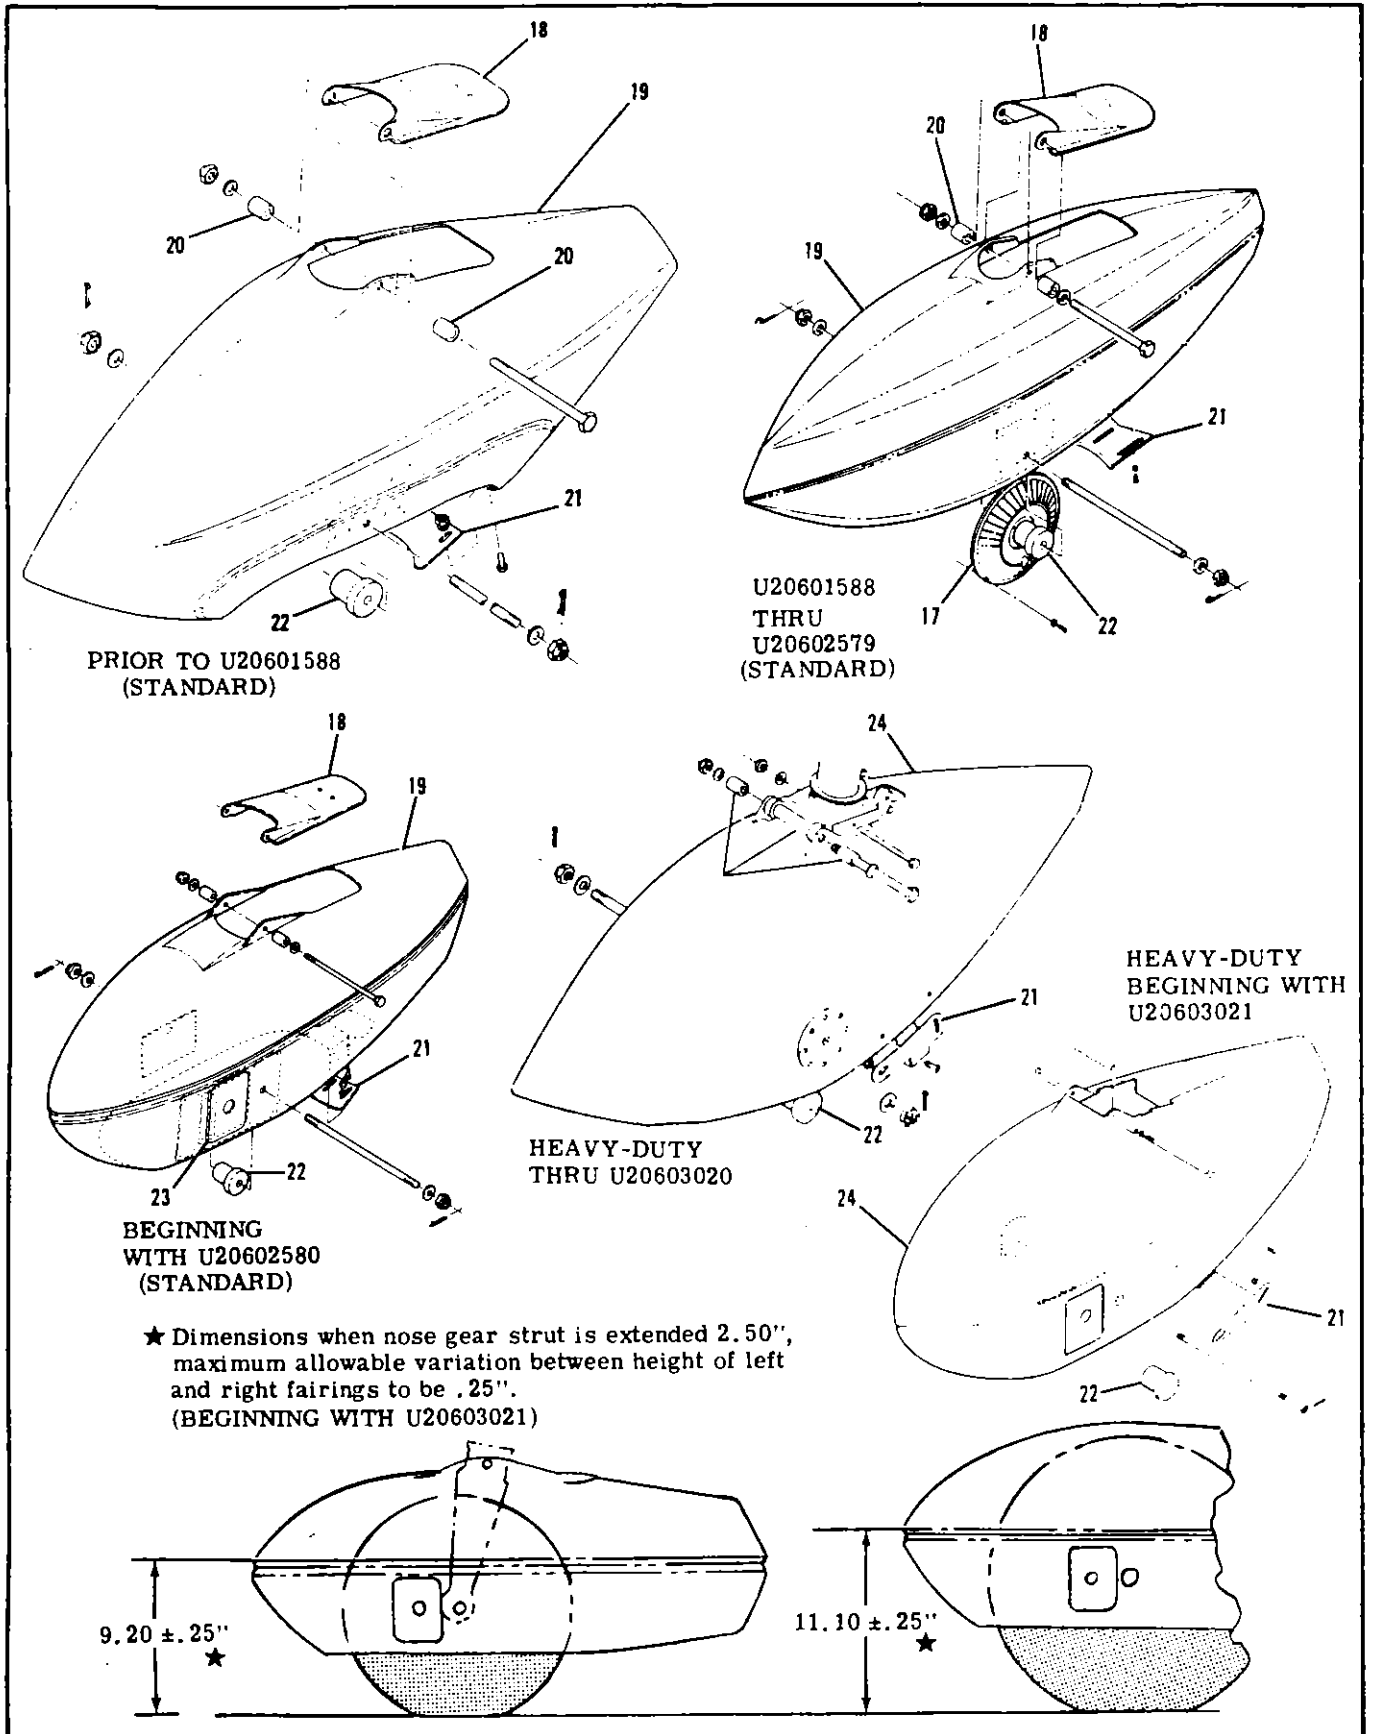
Nose Landing Gear (Sheet 2 of 2)
